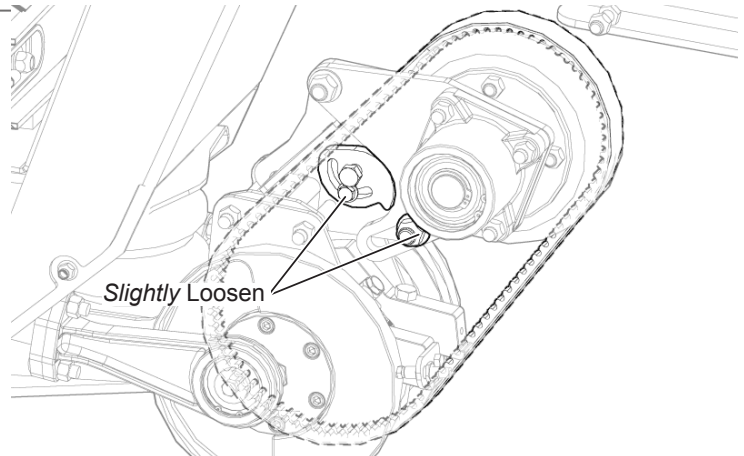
Knife Belt Tension - loosen lock nut and bolt
